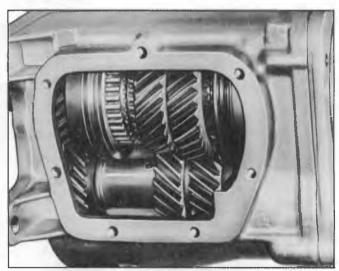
B-Third and Fourth Speed Synchronizer Clutch Sleeve in Fourth Gear Position
